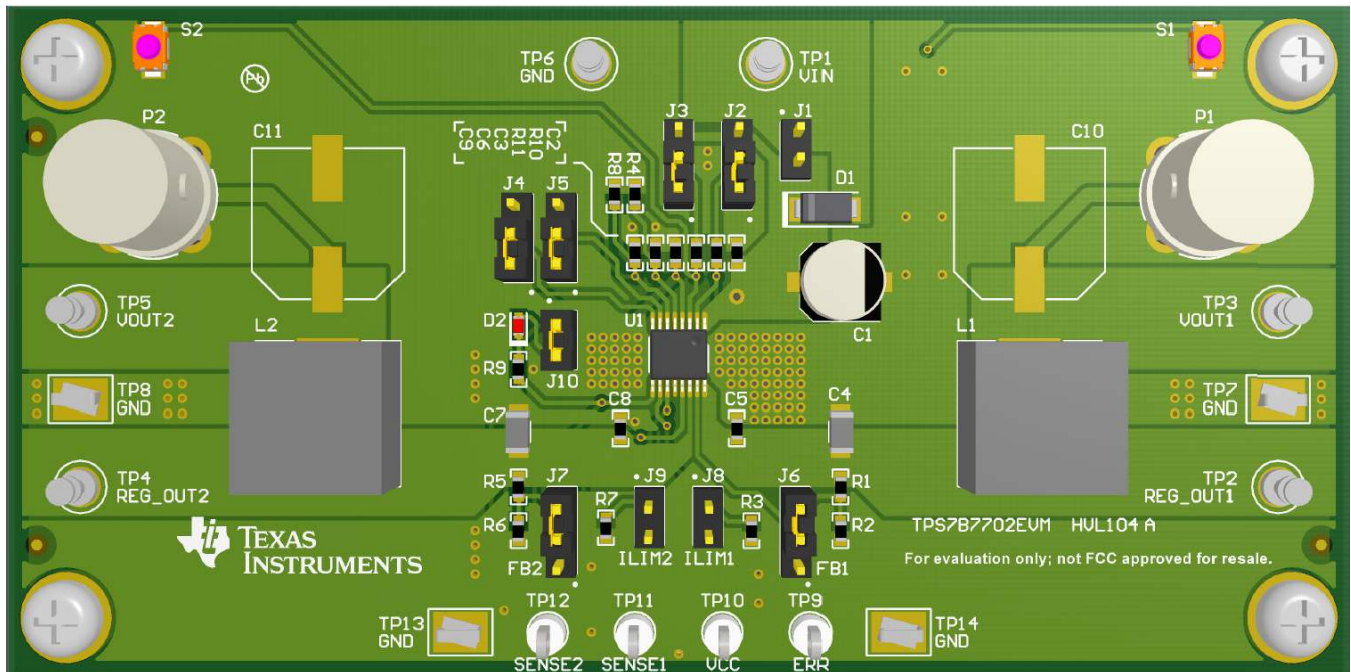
TPS7B7702EVM Component Placement (Assembly Top View)
